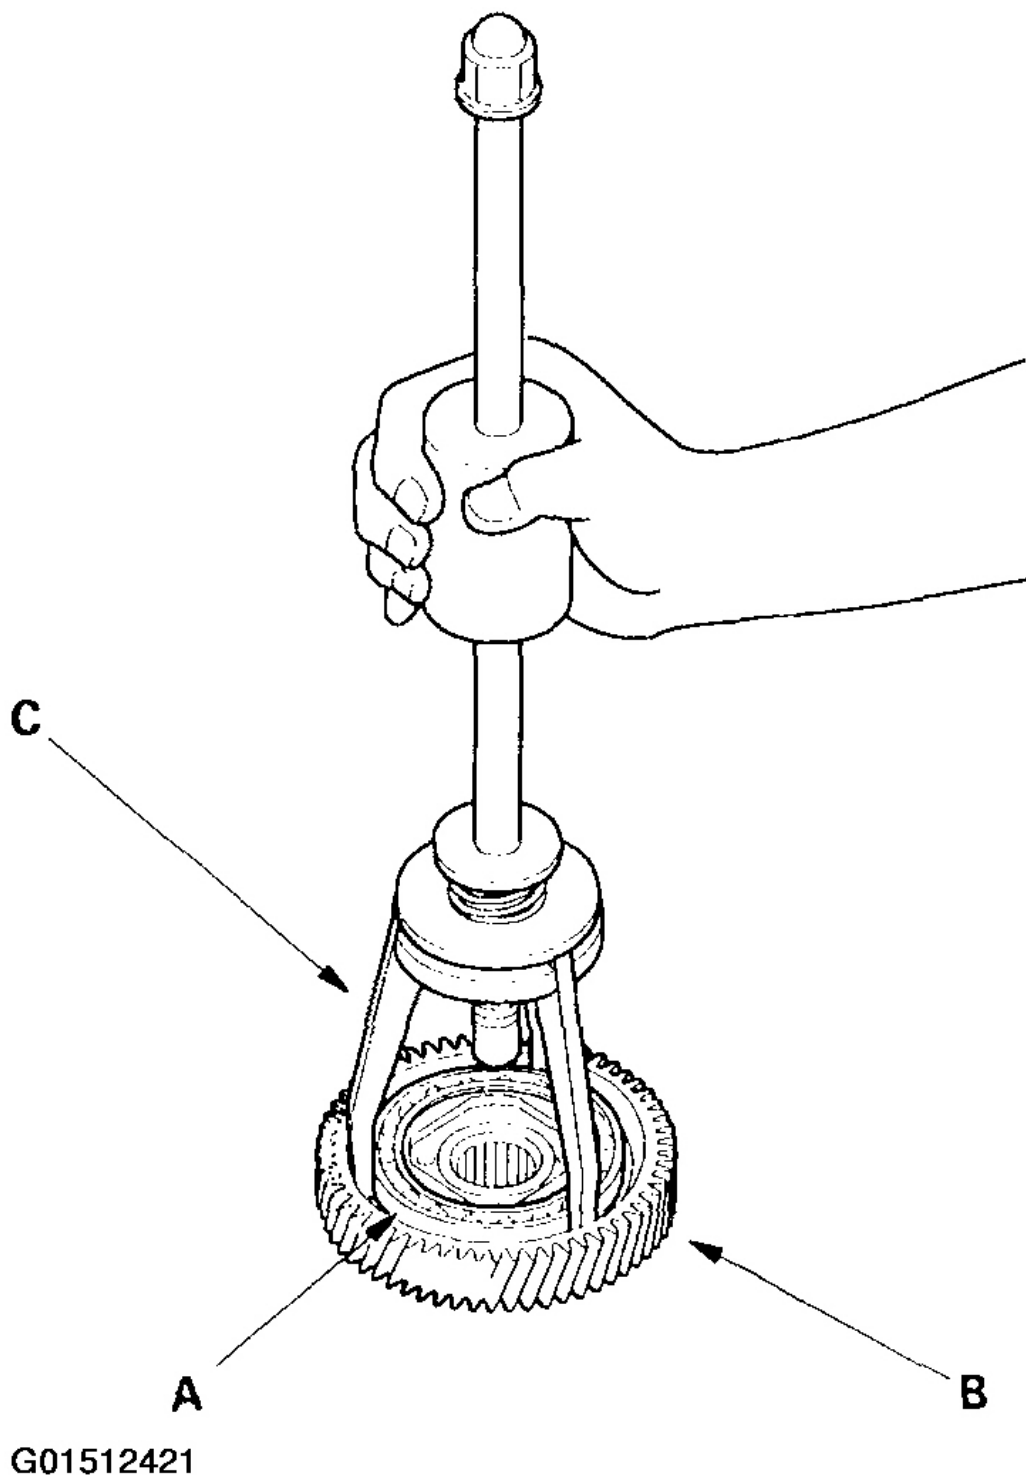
Removing Bearing From Secondary Shaft Idler Gear
